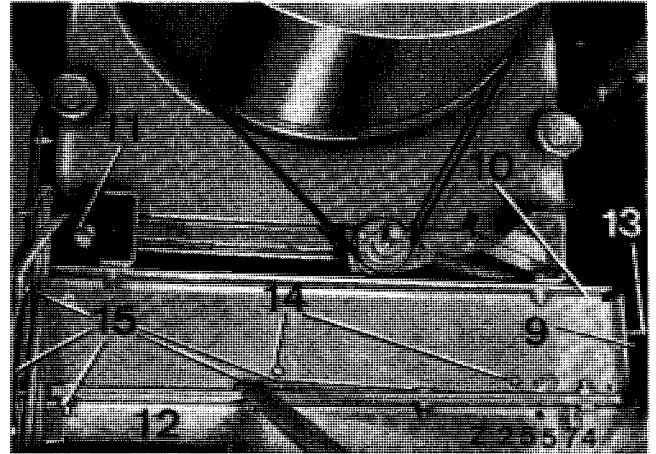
Removing Right-Hand Engine Mounting Bracket
